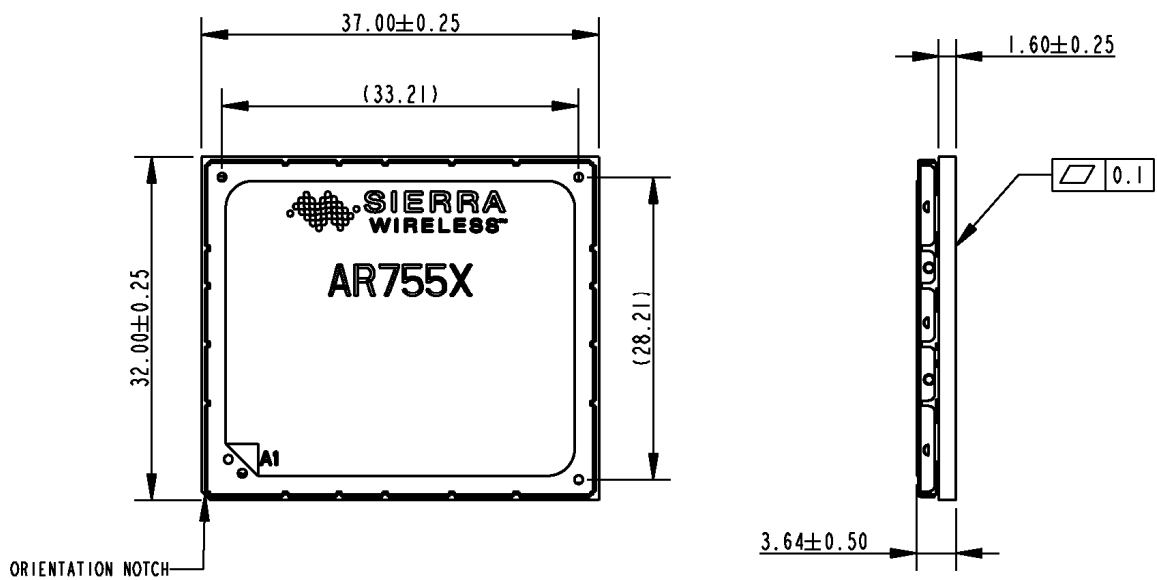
AirPrime AR7550 Mechanical Dimensions Drawing
